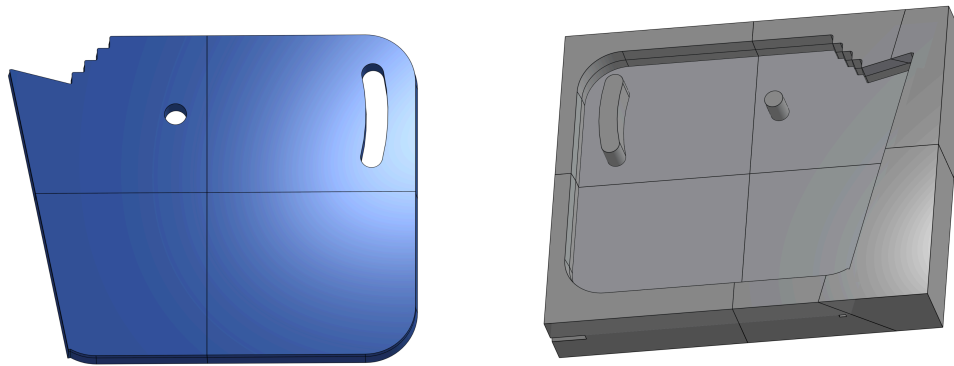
& 34: CAD render showing complete male (left) and female (right) pylon mold assemblies.
